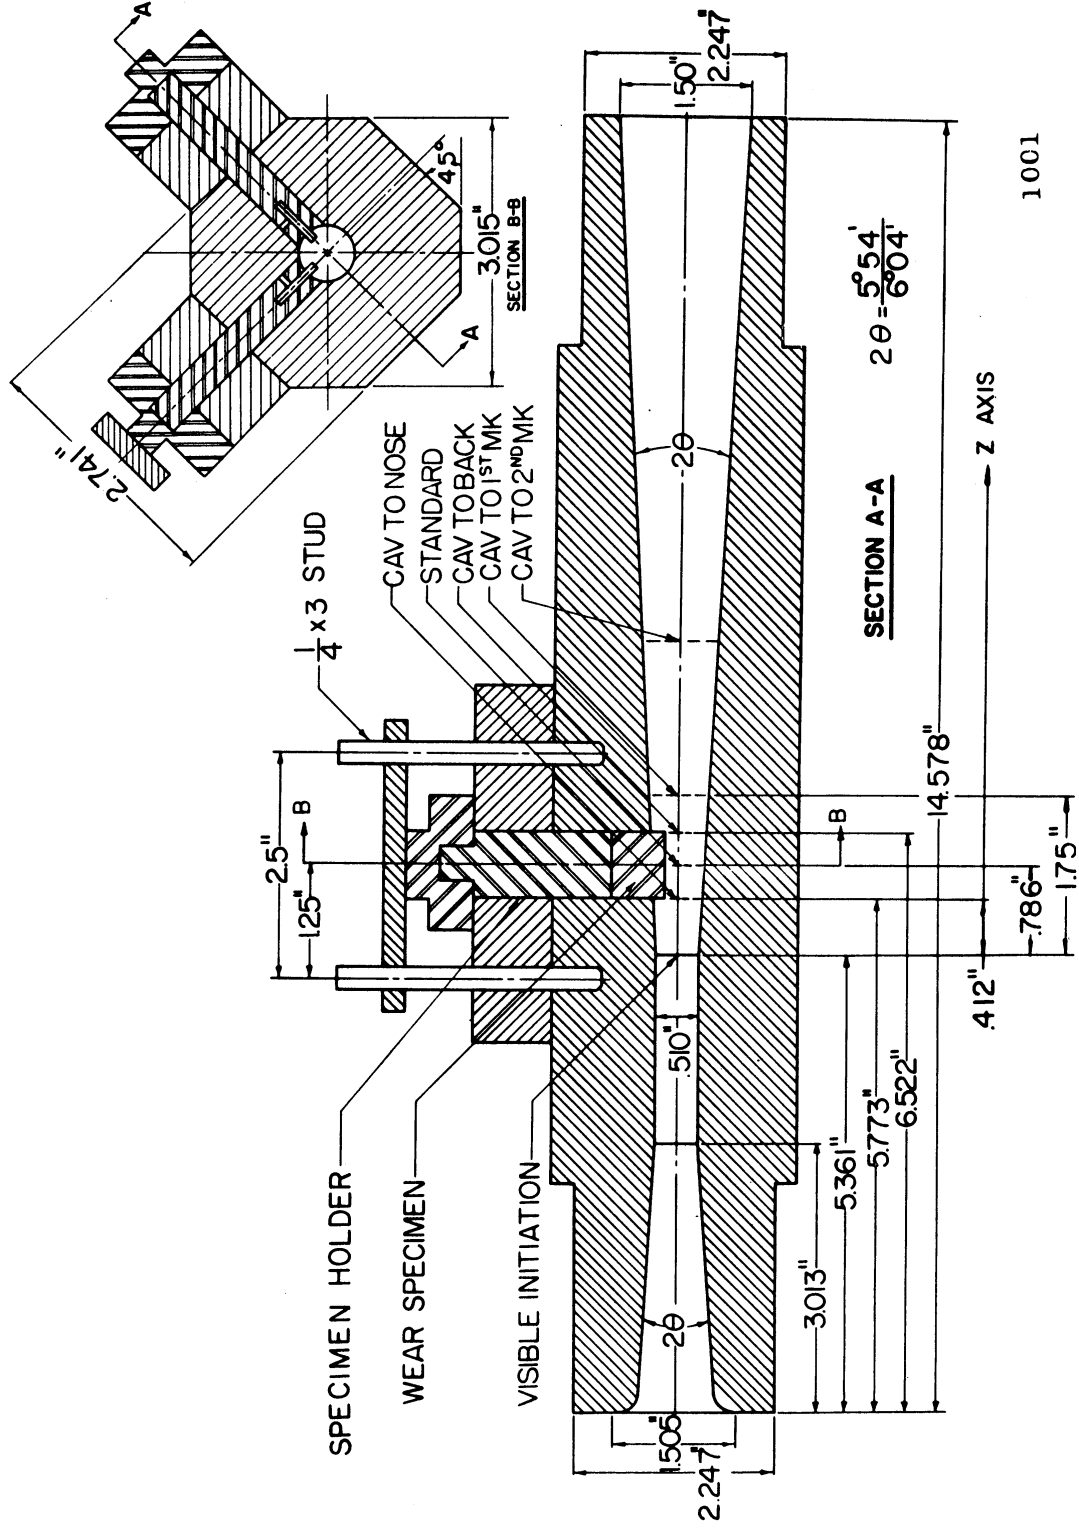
Drawing of the damage test venturi showing location of specimens, specimen holders, and cavitation termination points.
